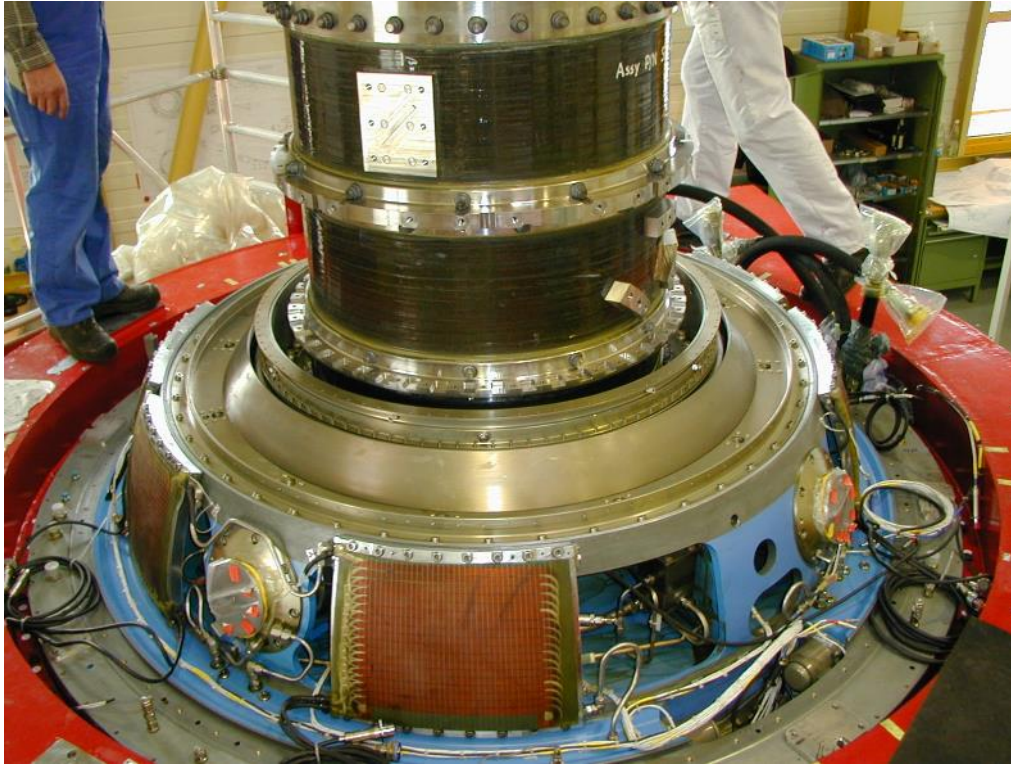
Telescope inner cradle w/Nasmyth tube installed.
